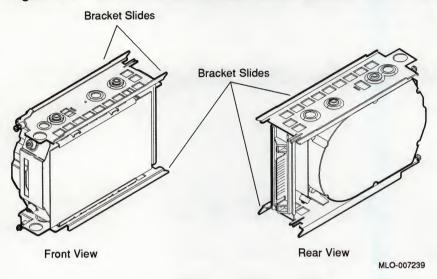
RF-Series 3.5-inch ISE (Front and Rear View)
